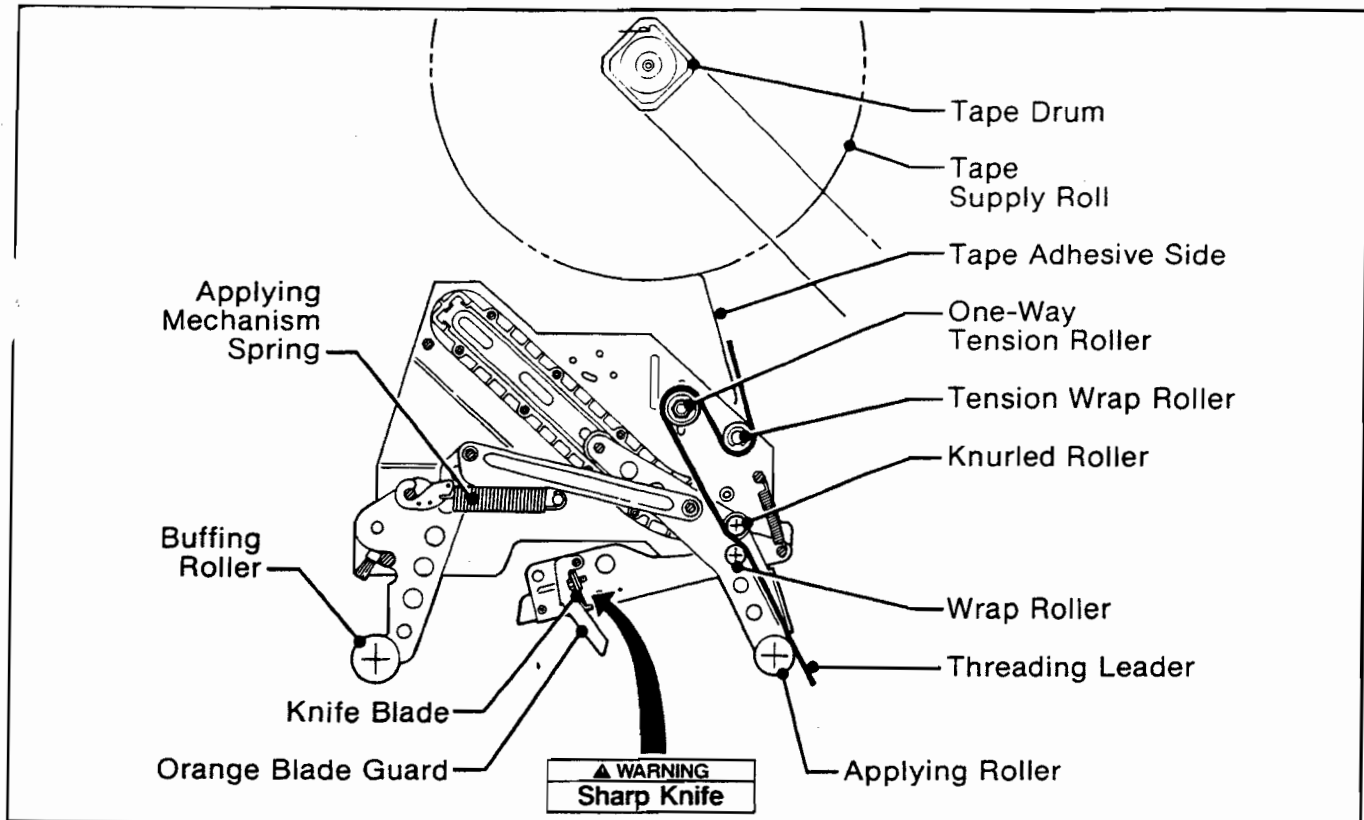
Tape Threading Diagram 800a/800a3 - Upper Taping Head - Left Side View
